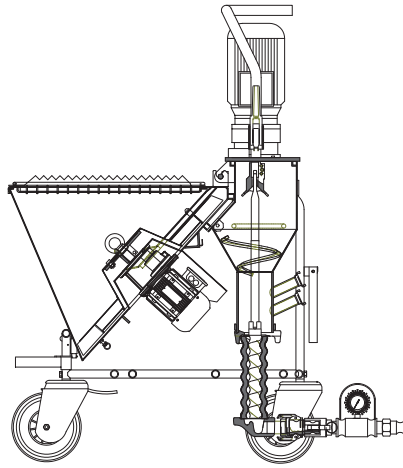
PFT G4 plastering machine (continuous mixer) with screw conveyor and mixing shaft (source: PFT)
